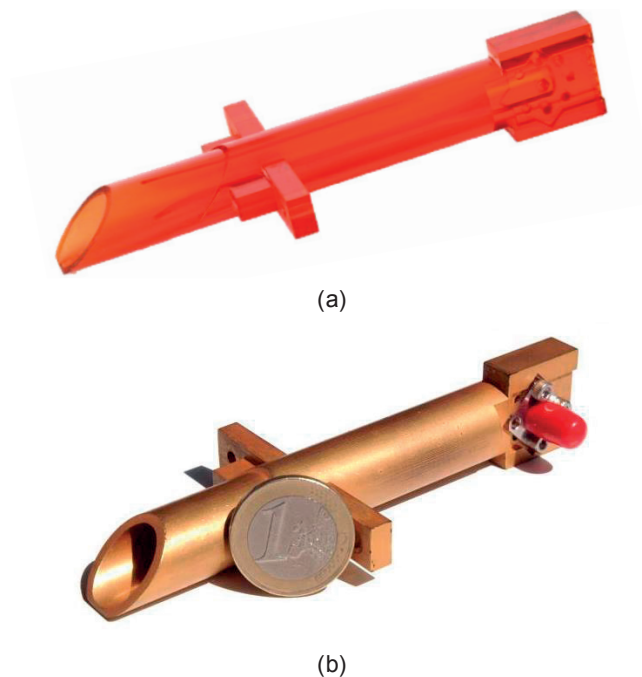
SLA feed prototype: (a) before metal coating; (b) after metal coating.
